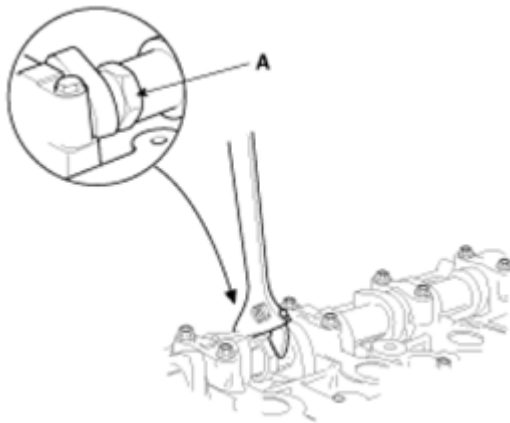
Removing Sprocket Bolt Or CVVT Assembly Bolt
